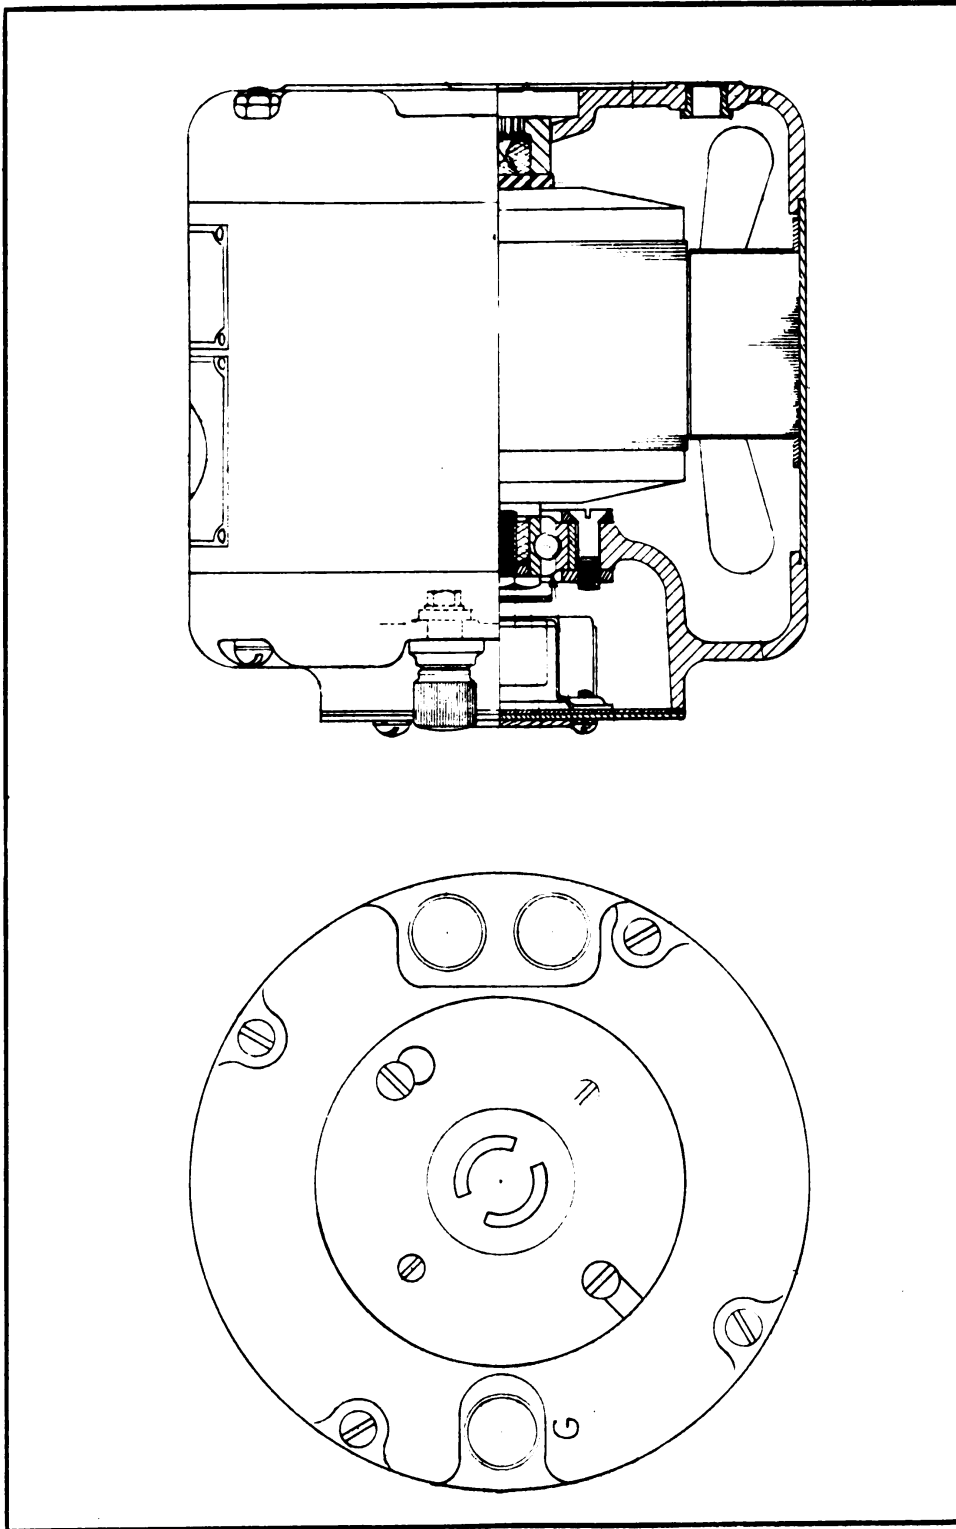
POWER UNIT PE-214-A—CROSS SECTION DRAWING OF GENERATOR GN-51-A
